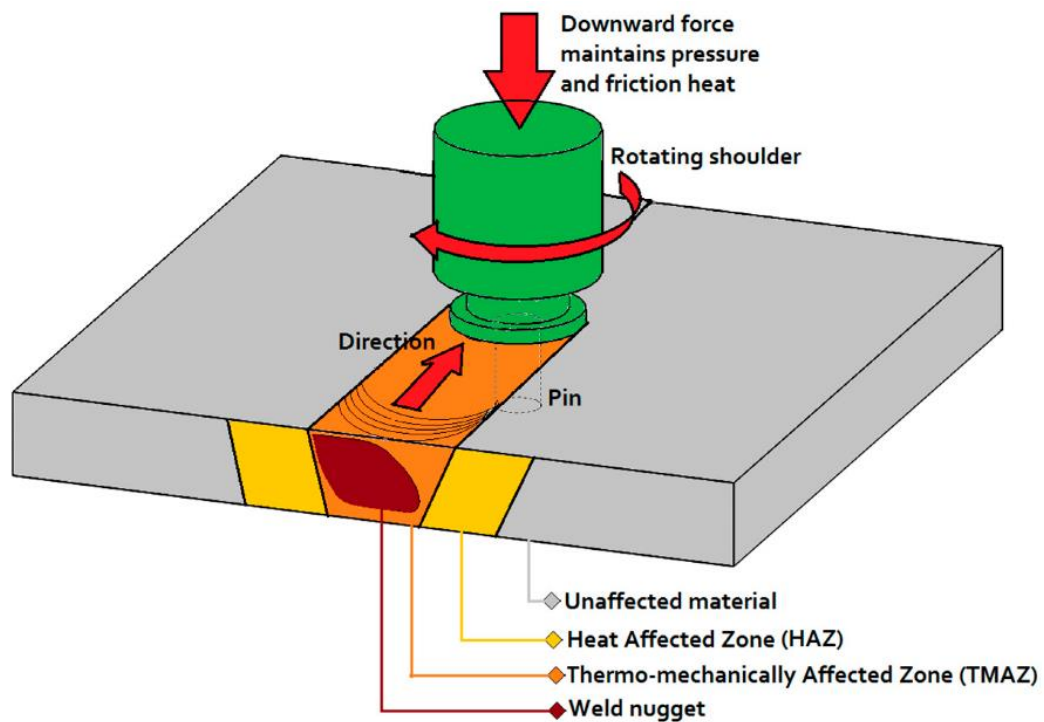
Schematics image of the FSW process showing the principle of the welding method and the different zones developed due to the welding thermal cycle of the welding process.
